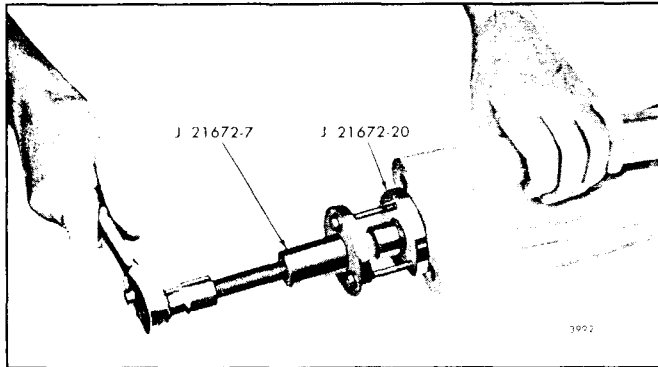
Removing Oil Seal Sleeve and Roller Bearing Inner Race from Rotor Shaft
